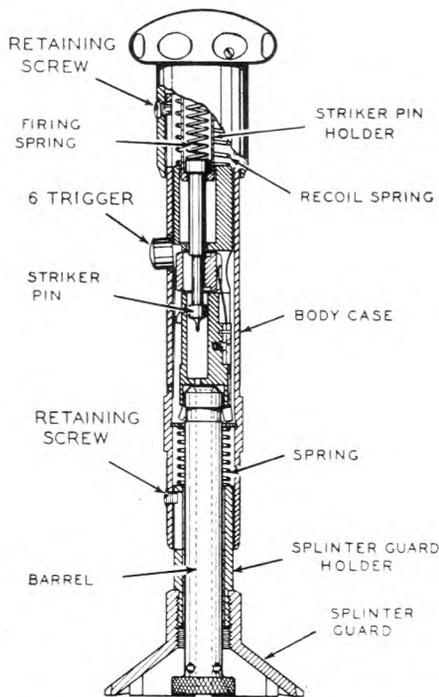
SECTIONAL VIEW OF GUN SHOWN AT 'A' IN FIG. 1.
